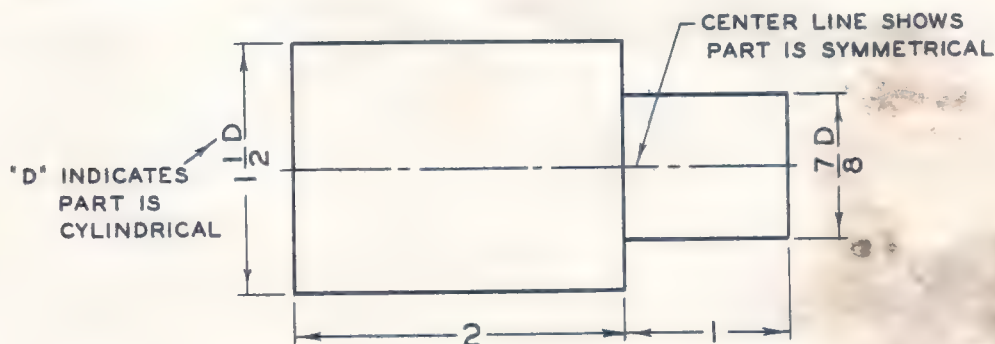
ONE-VIEW DRAWING OF A CYLINDRICAL SHAFT
